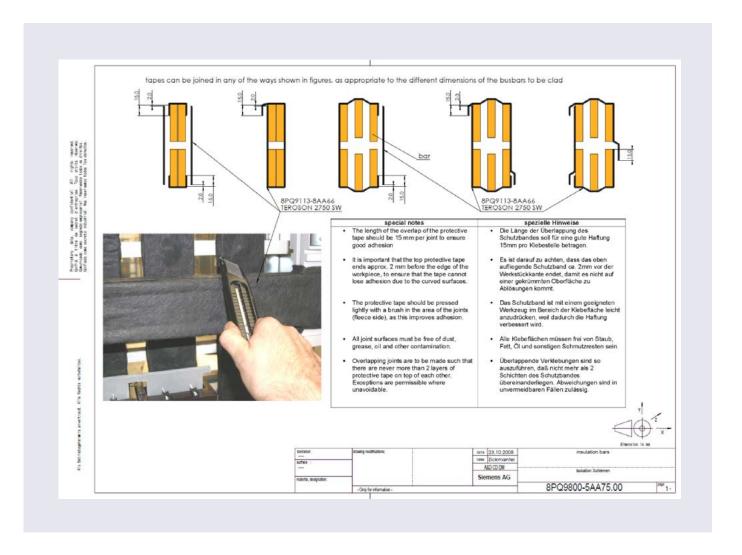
Work instruction for the installation of a passive system for Siemens switchgear and switchboards
